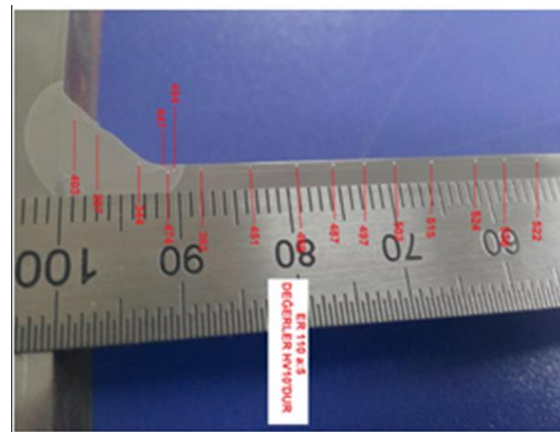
Hardness values of the sample with 3 mm welding height (horizontal line)
